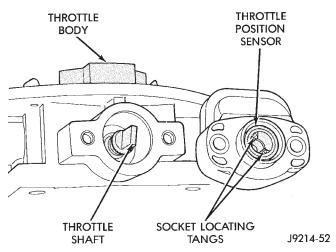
Installation—5.2L/5.9L Engines—Typical
